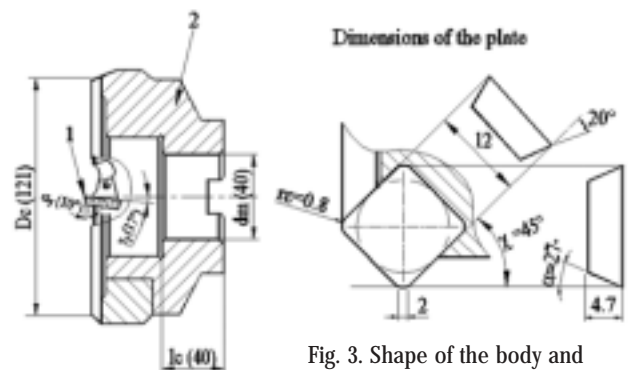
Shape of the body and dimensions of the plate: 1-plate; 2-body
